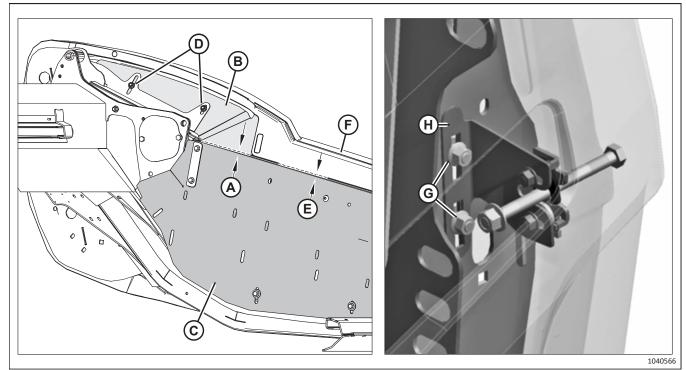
Clearance Specification between Neck Shield and End Panel
